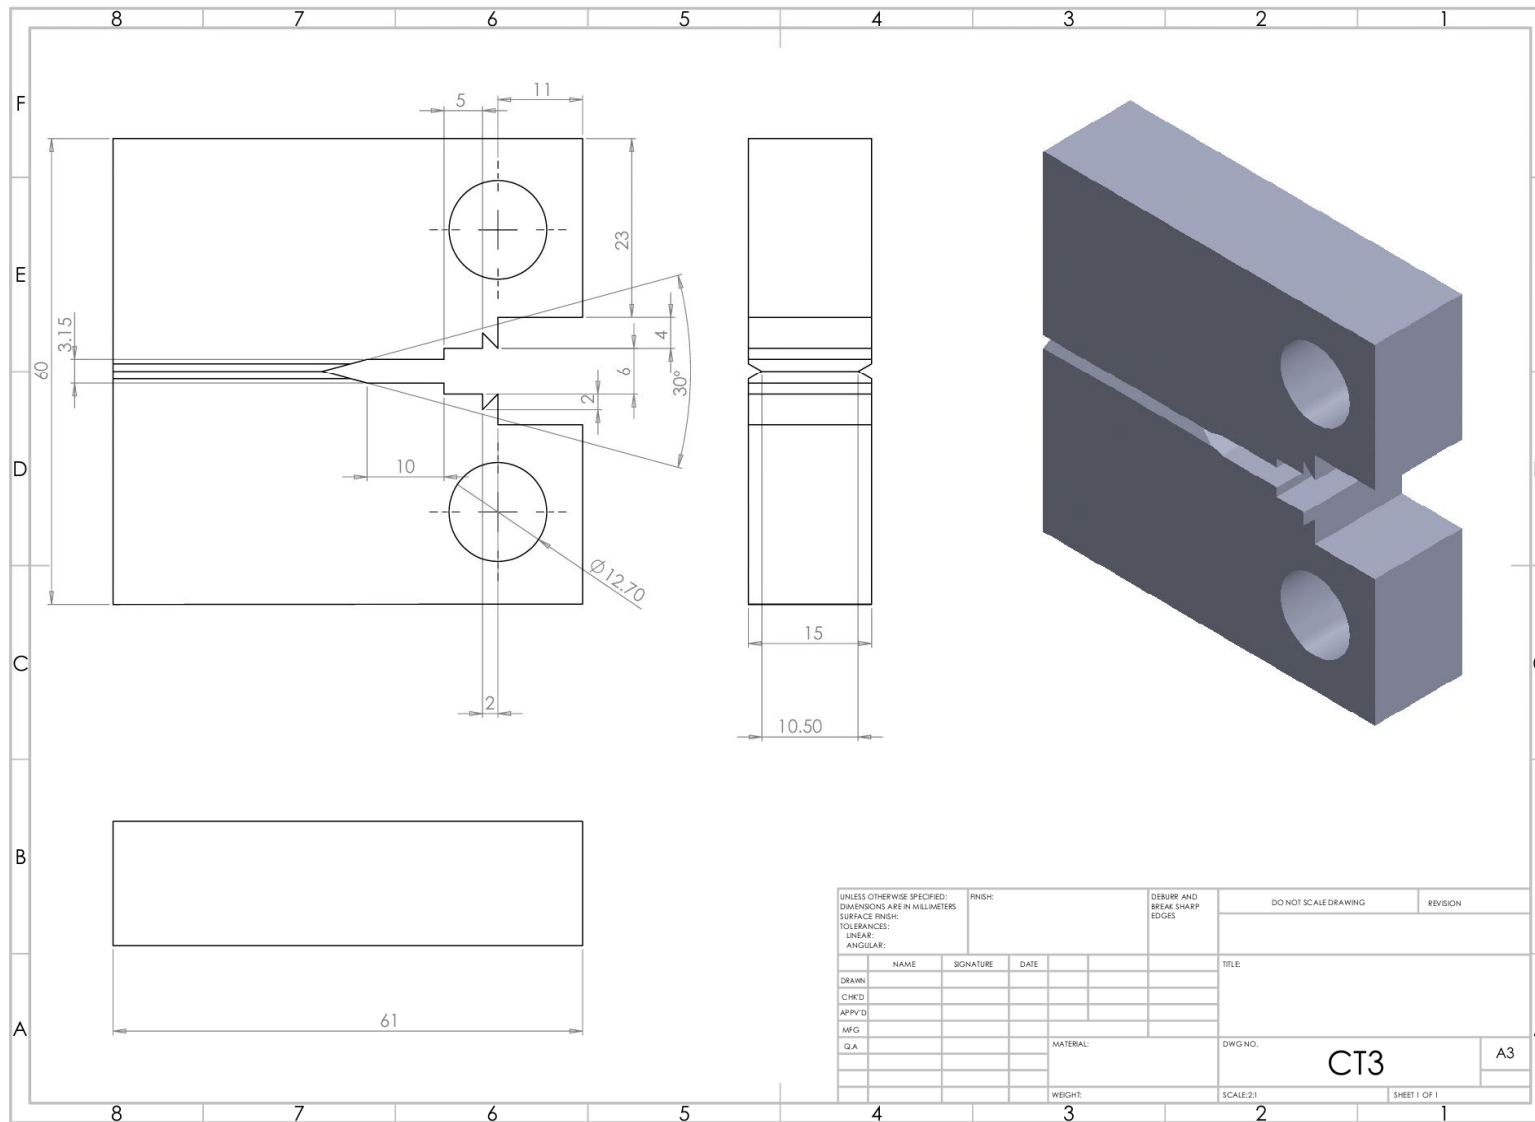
C(T) Specimens used in fatigue crack growth and fracture toughness testing
